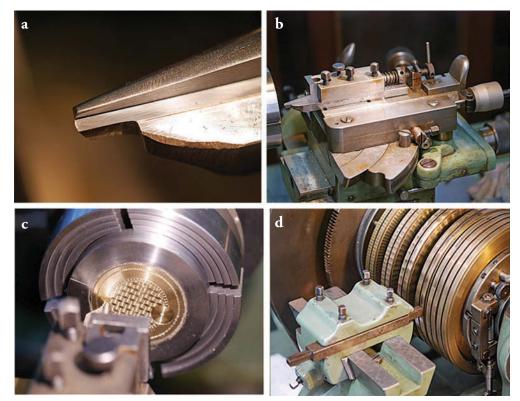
The cutting tool and geed; 15b. The slide; 15c. Cutting tool and geed engaged with the work; 15d. Rosette engaged with the rubber (Courtesy of Brittany N. Cox)
